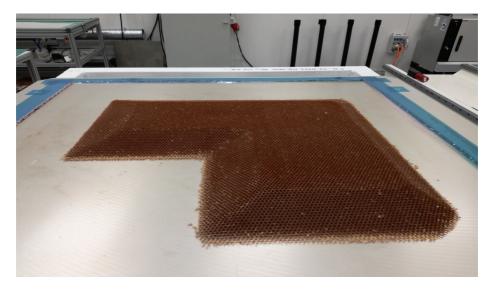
Aramid honeycomb core after CNC machining to required shape [Michalski, 2018]
